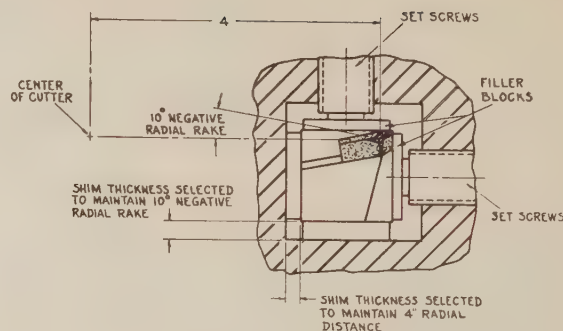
ALL TOOL BITS WERE ACCURATELY POSITIONED IN CUTTER HEAD BY AID OF SHIMS
